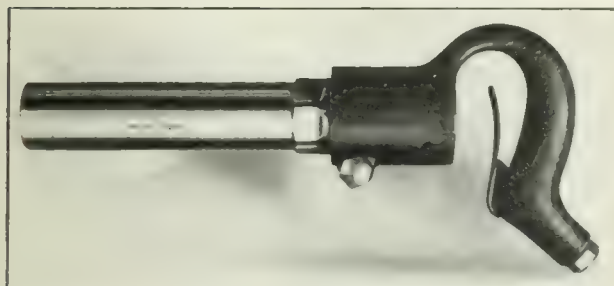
A Steel Casting Chipping Hammer Made by the Cleveland Pneumatic Tool Company, Cleveland, Ohio.
